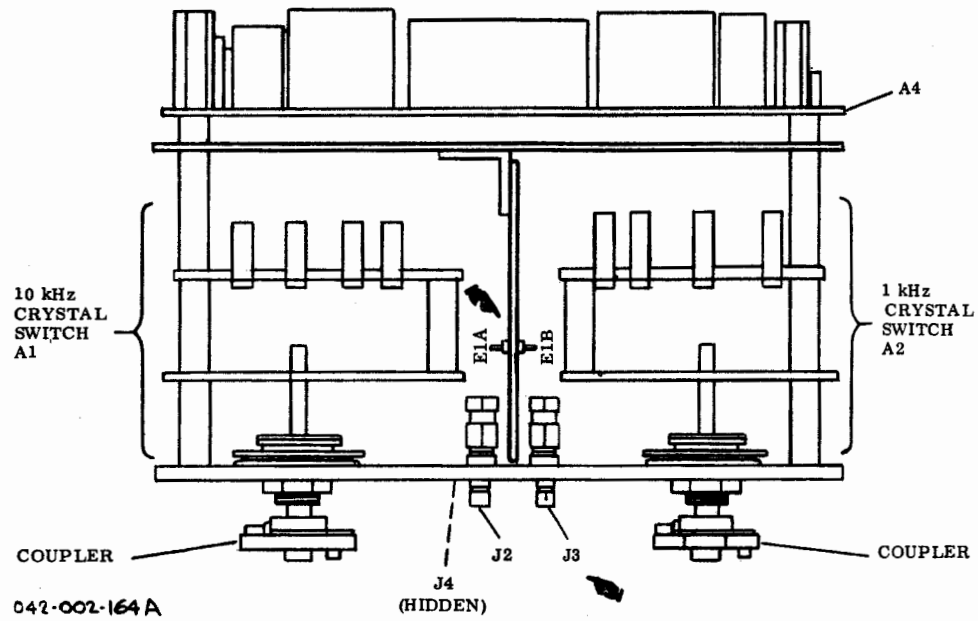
1- and 10-kHz Synthesizer Subassembly A2A6A3, Disassembly Parts Location
